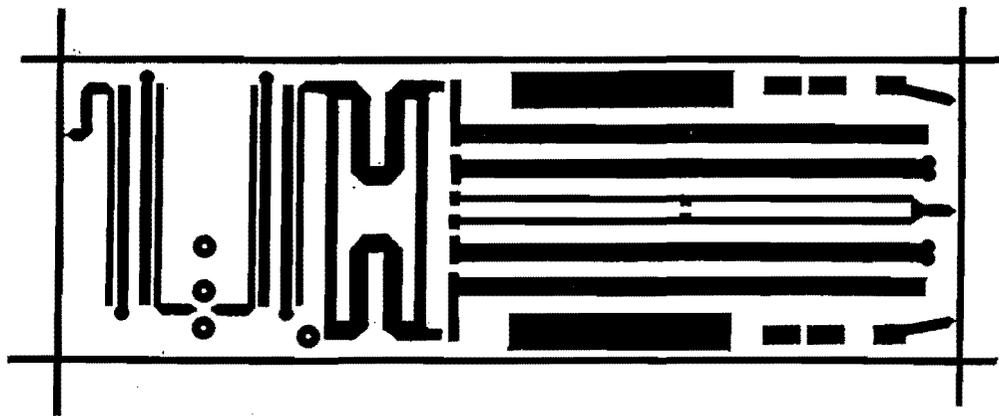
1296 MHz RX mixer PCB (0.8mm double-sided FR4).
